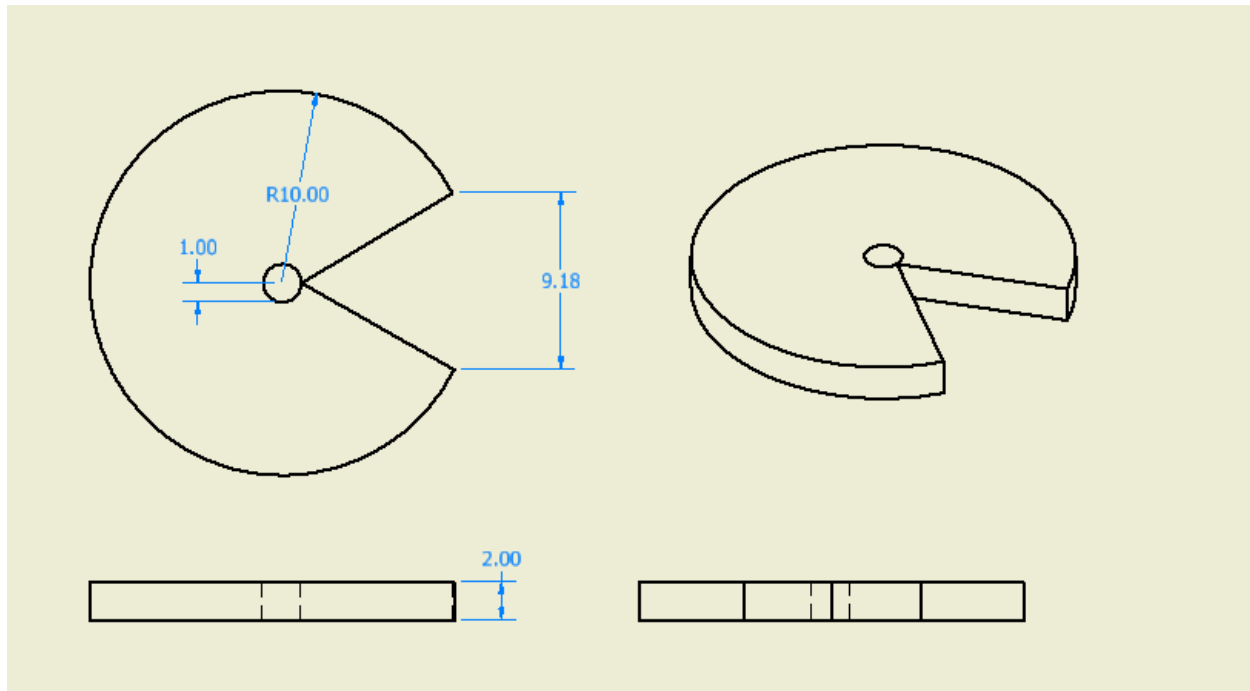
Engineering Drawing of the pill lid which the pill fell through.
